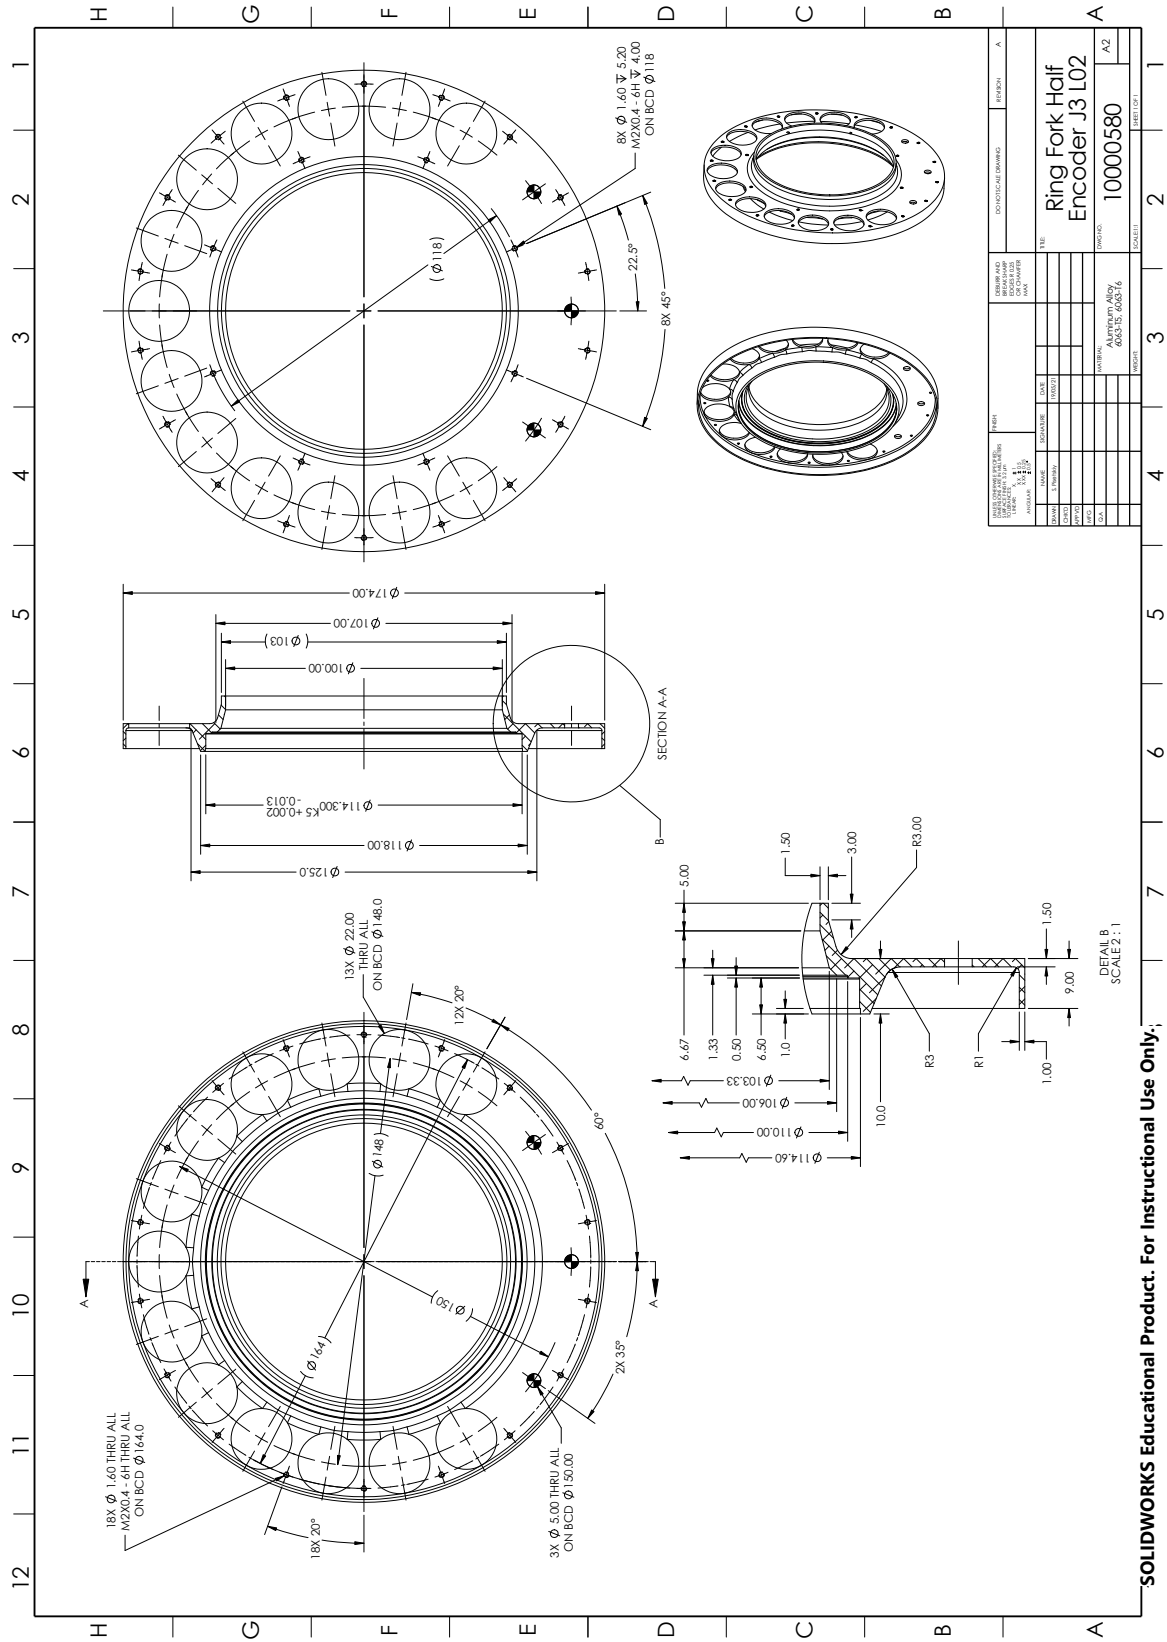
Drawing: Link 2 Joint 3 fork half encoder ring.
